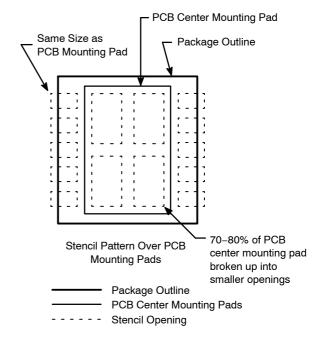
Typical DFN Package with Stencil Openings Shown Over PCB Mounting Pads
